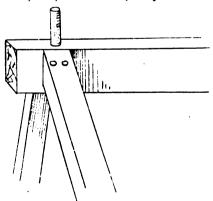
SHOWING A STYLE OF GEAR HORSE.
